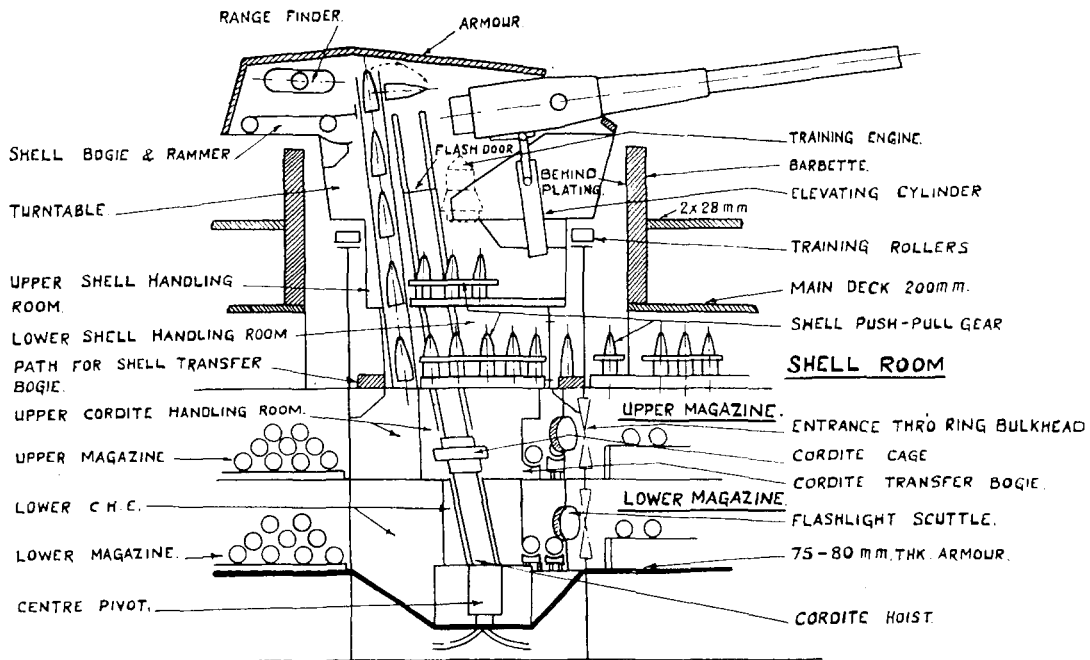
SIDE VIEW OF TYPE 94—18" TRIPLE MOUNTING
